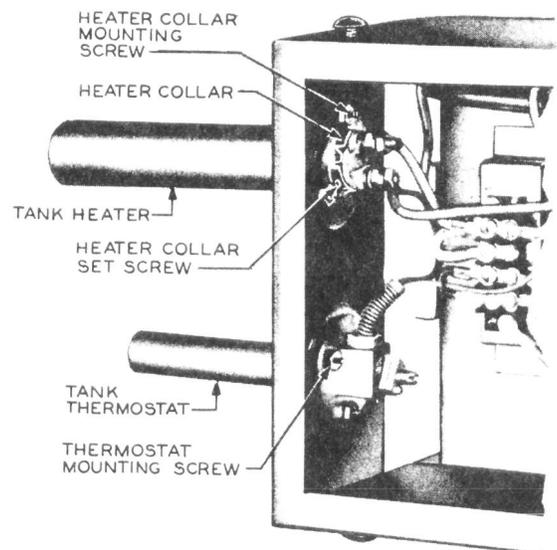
Tank Heater Thermostat and Associated Parts (Control Panel Removed From Processor)
